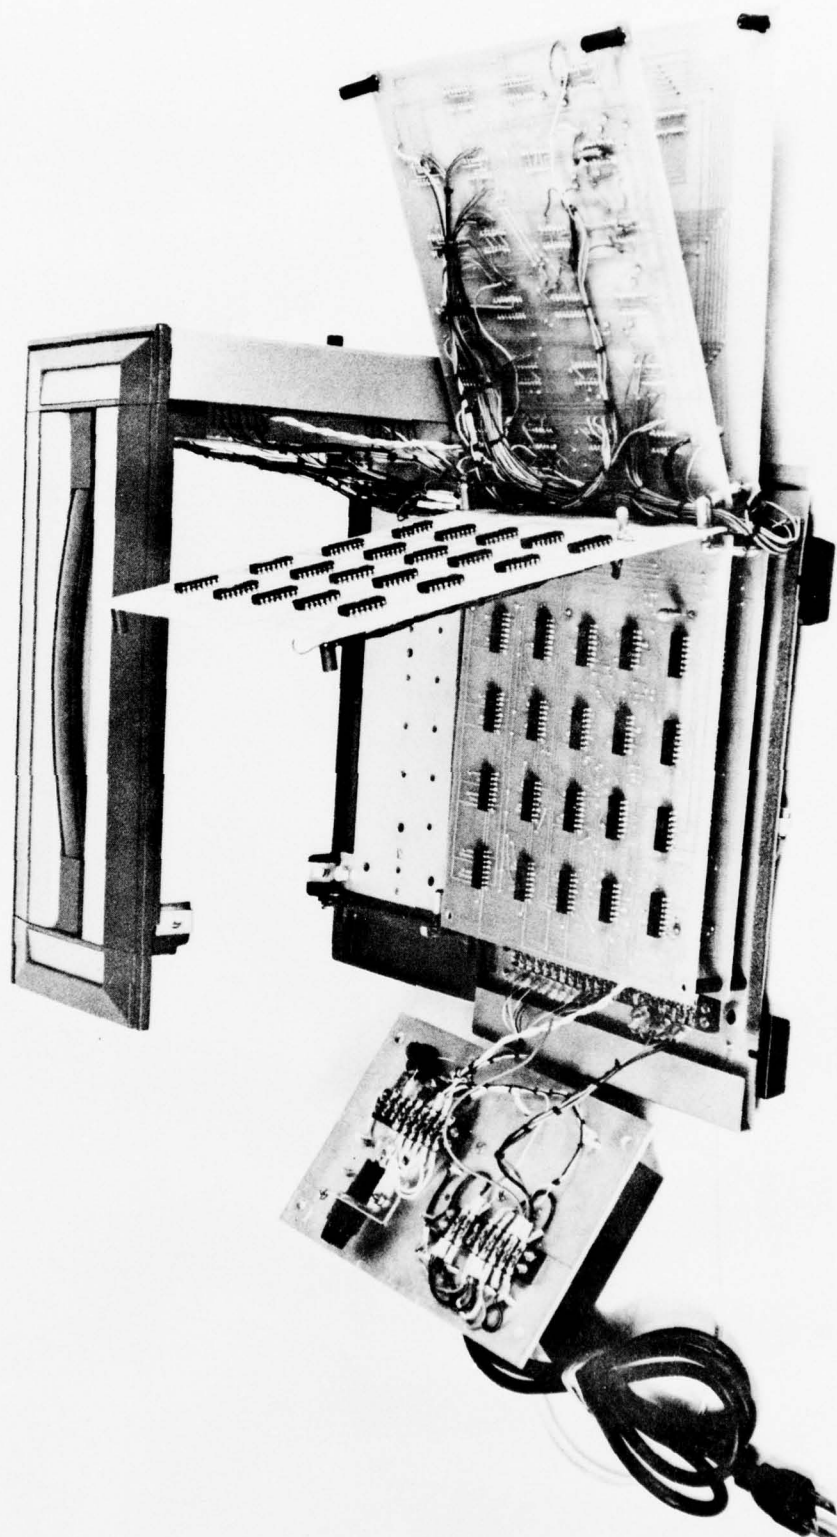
SSRD ASSEMBLY, VIEW 3
